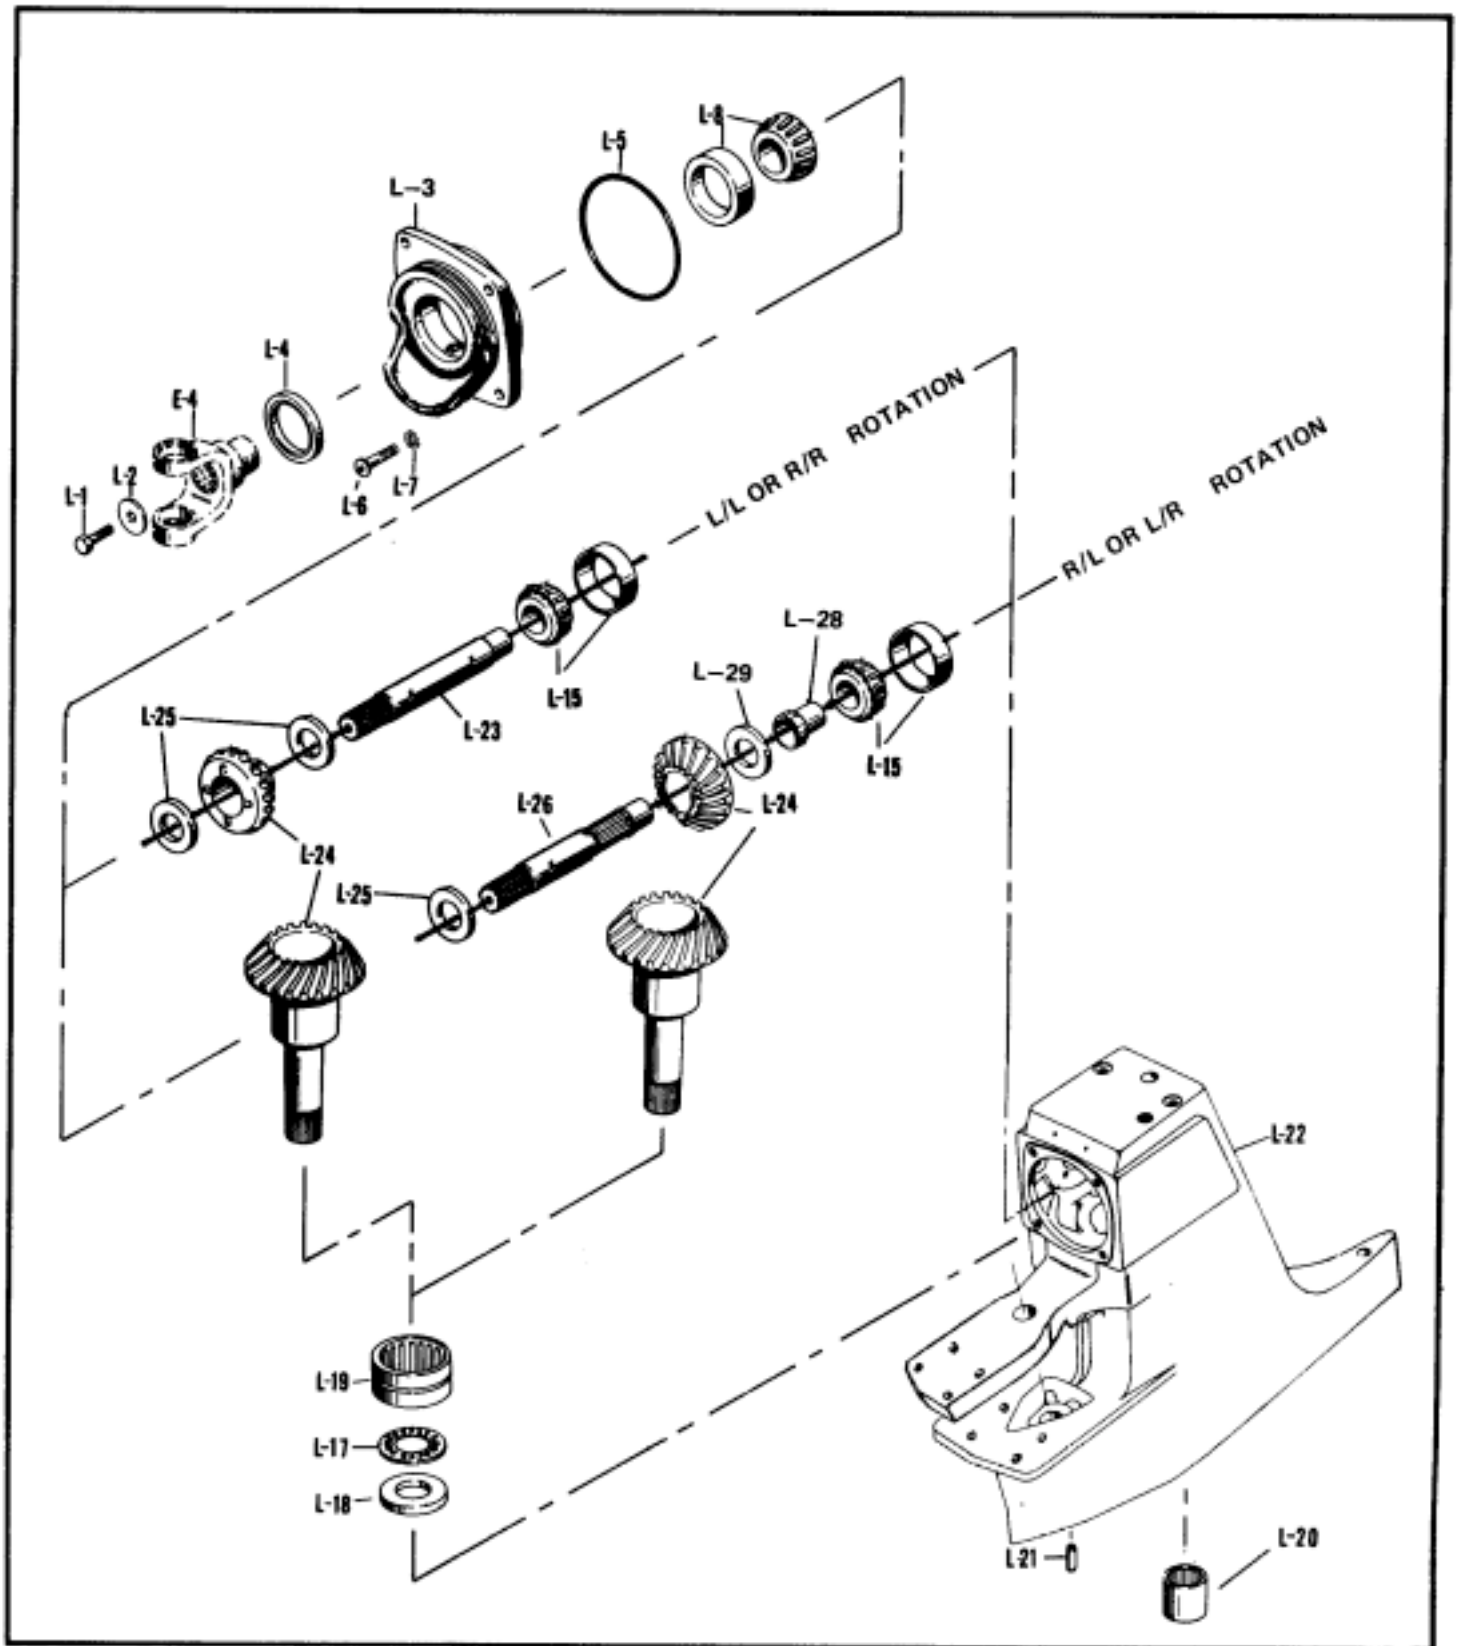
UPPER CASE ASSEMBLY (MODELS 101/103/105/107)
